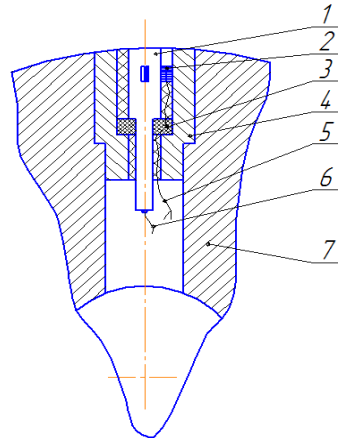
Sensor for simultaneously measuring the thickness of a lubricating layer and pressure developing in it
